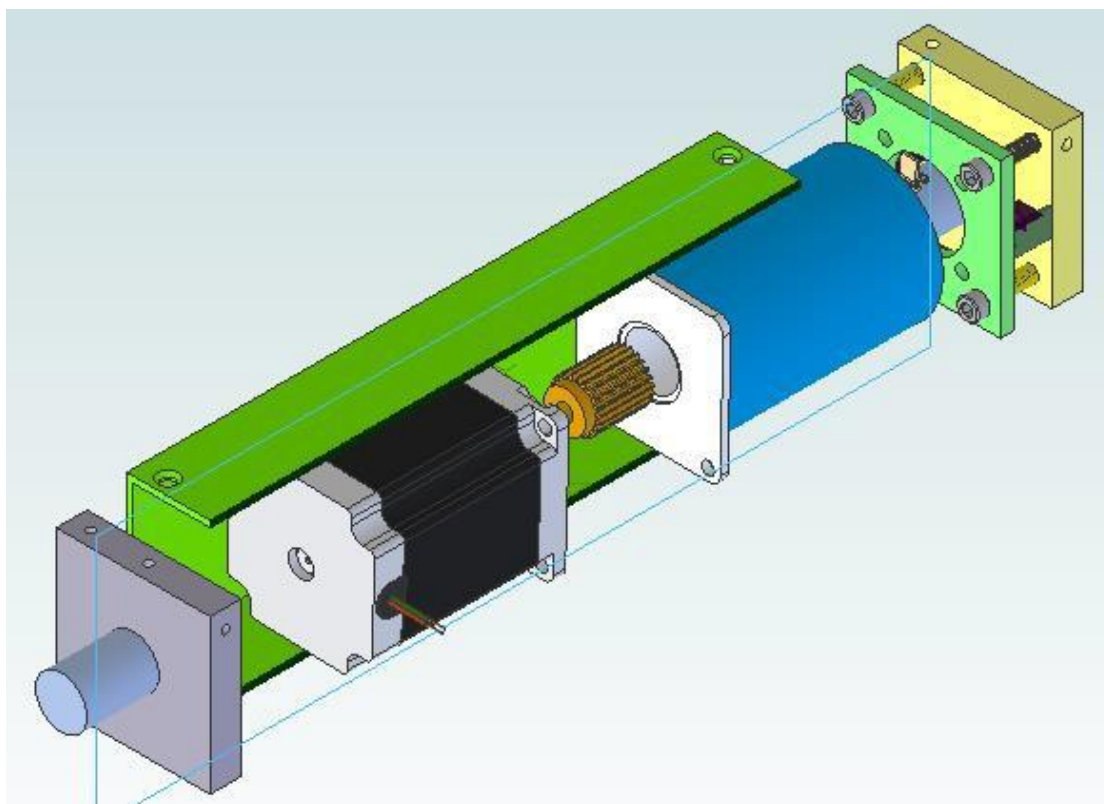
Construction with motor, planetary gearbox and end blocks.
